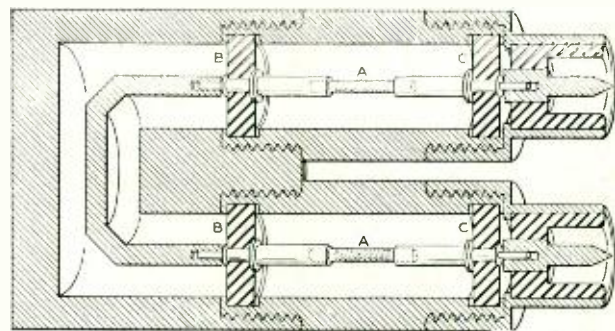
Cross-section of U-shaped coaxial loss unit to have but one direction of motion
